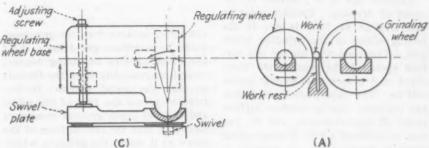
Adjustments of grinding wheel base and regulating wheel base.
